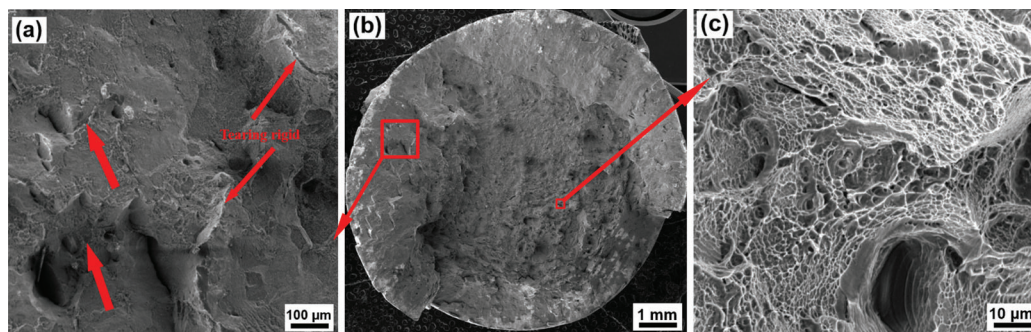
7b shows the complete fracture morphology of solid tensile test pieces; 7a and 7c show cleavage and ductile fracture characteristics of solid tensile test pieces, respectively
